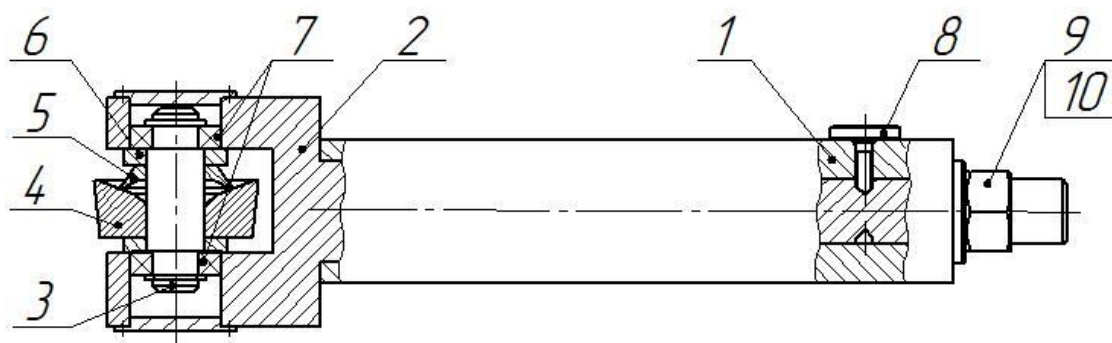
Rotary peakless rotary turning cutter with chip breaker
